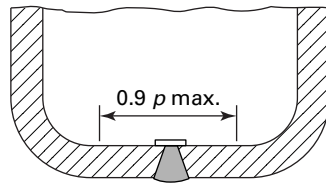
BOX TYPE HEADER JOINT
